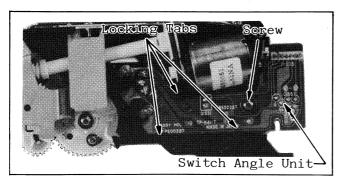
Adjustment of Cassette Up Gears-(6)
